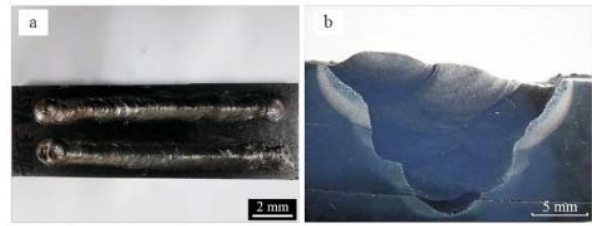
b. b. Welding of austenitic electrode on the EH40 ship steel plate deposited at 7m immersion depth: (a) weld surface formation; (b) cross section of the multi pass butt-weld joint. [y] Guo, N., et al. "Microstructure and Mechanical Properties of an underwater wet welding dissimilar ferritic/austenitic steel joint." *Strength of Materials* 47.1 (2015): 12-18.
